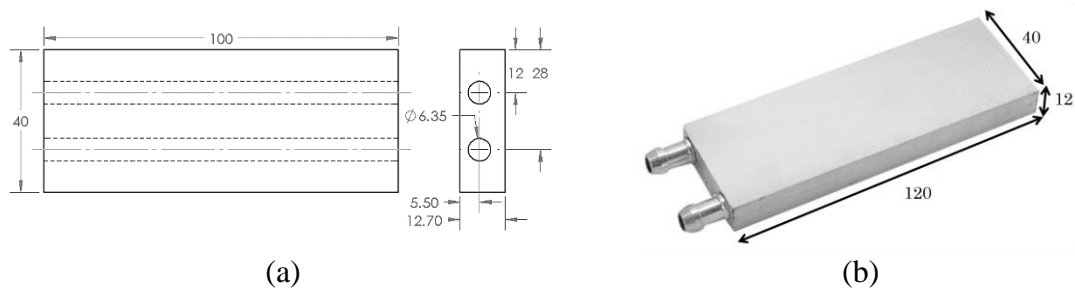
Dimensions of (a) Heater block and (b) cold plate dimensions.
